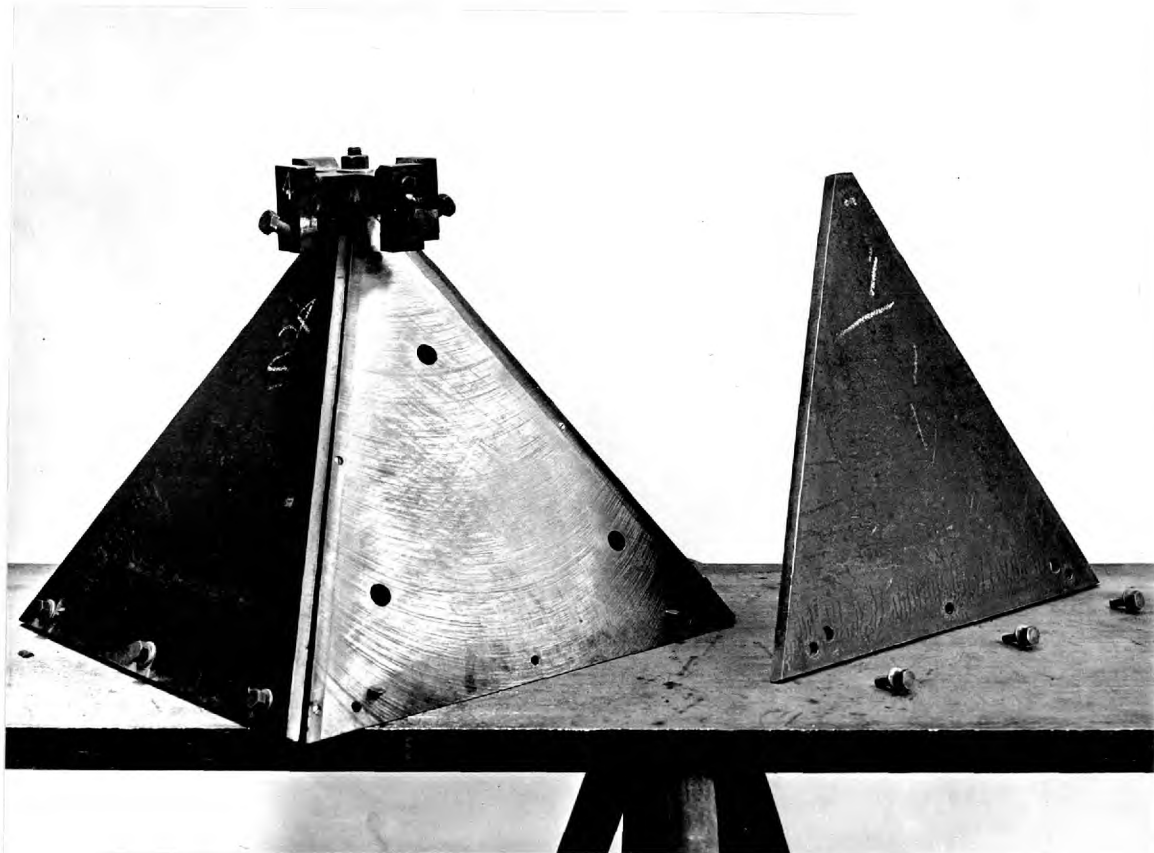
Jig for welding of pyramid walls.
